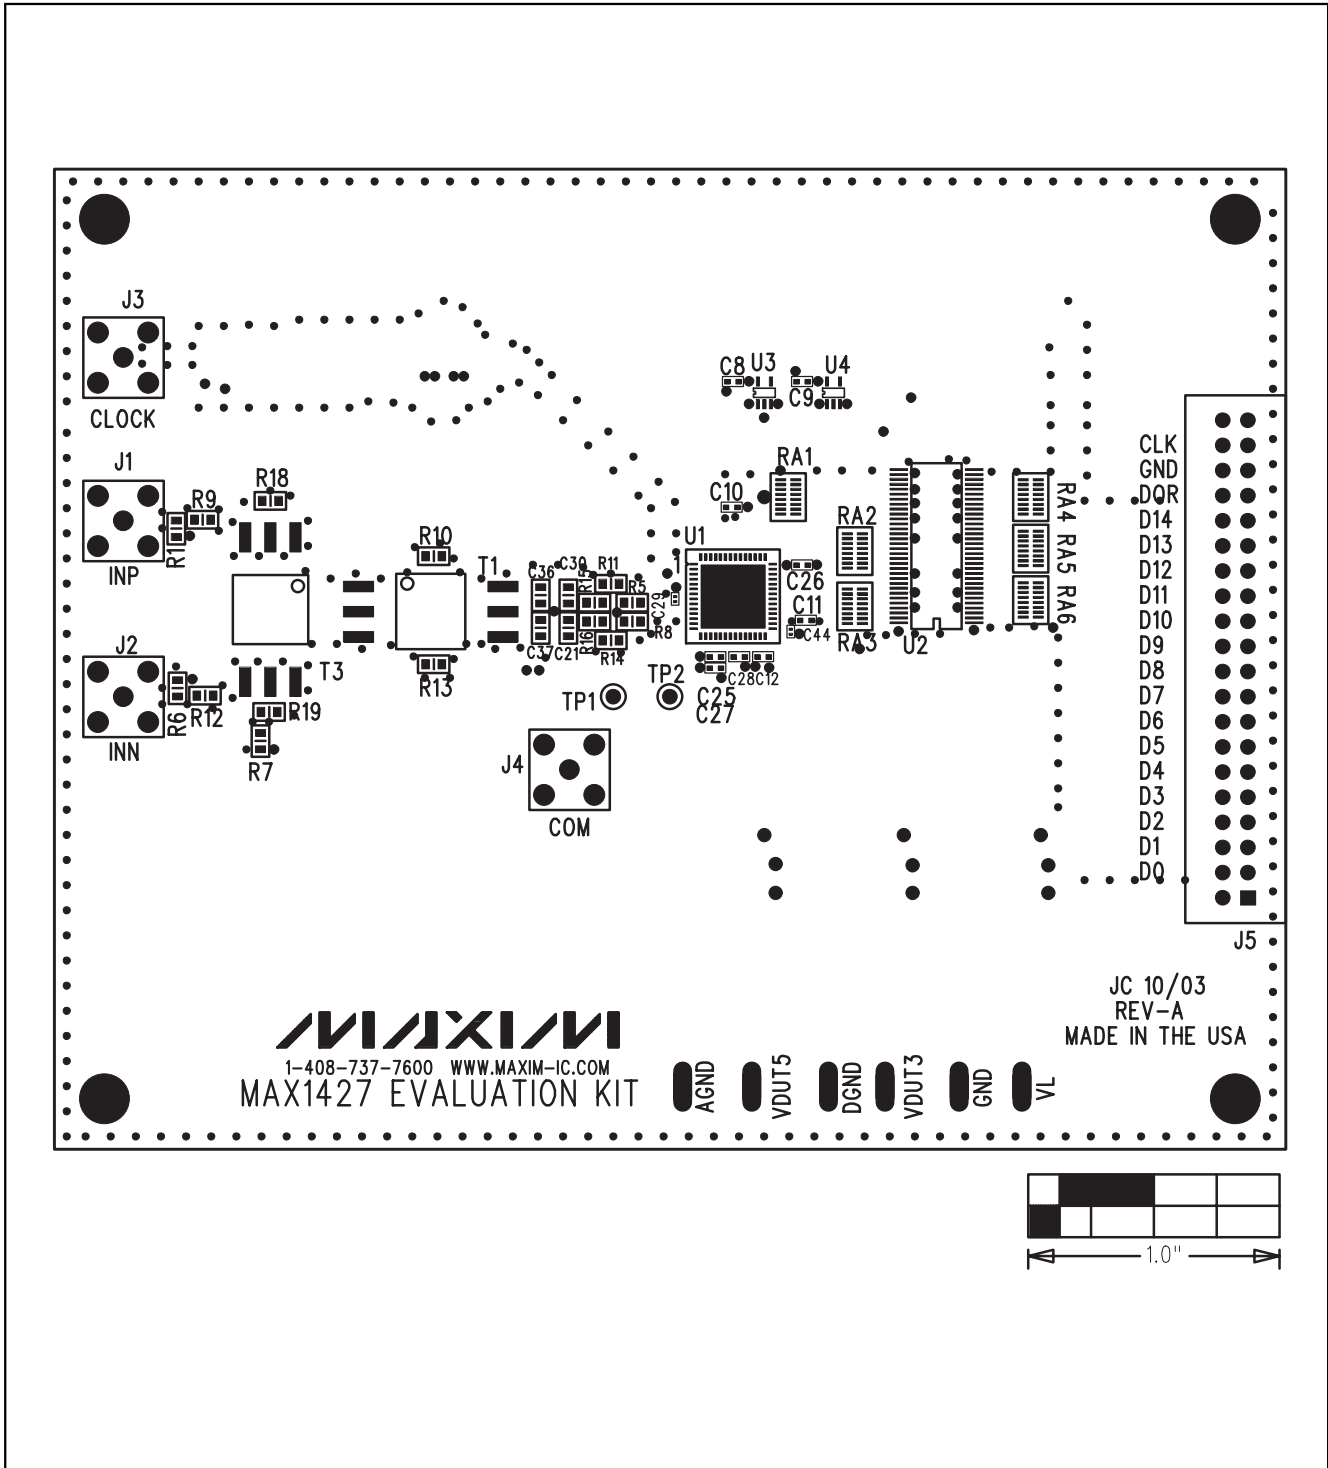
MAX1427 EV Kit PC Board Layout—Component Side
